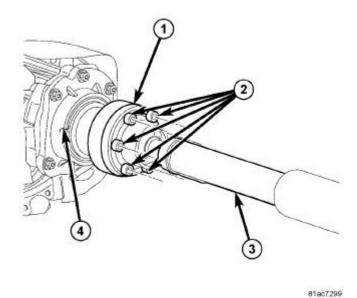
Propeller Shaft To PTU Fasteners Courtesy of CHRYSLER LLC
